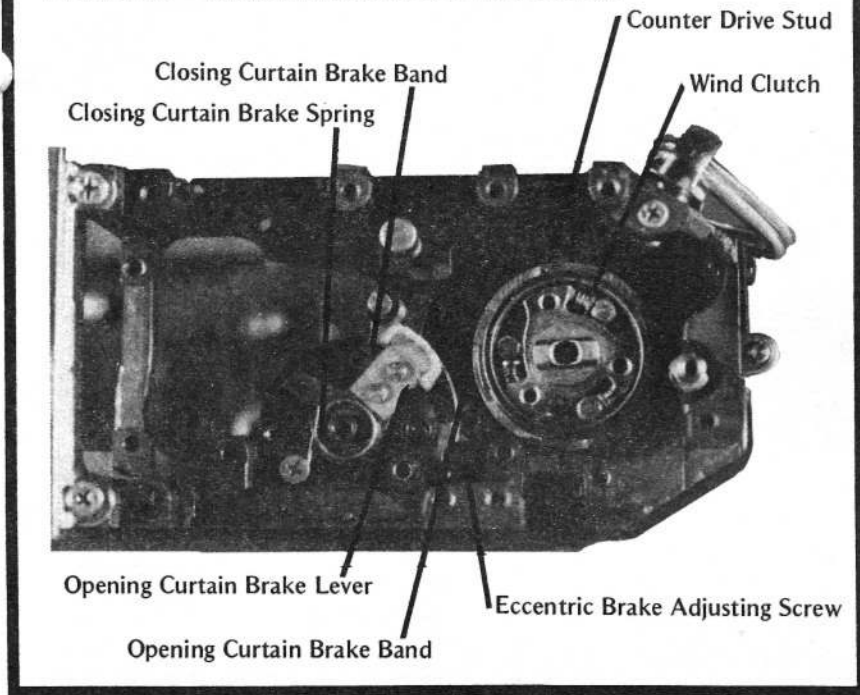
SHUTTER CURTAIN ASSEMBLY
